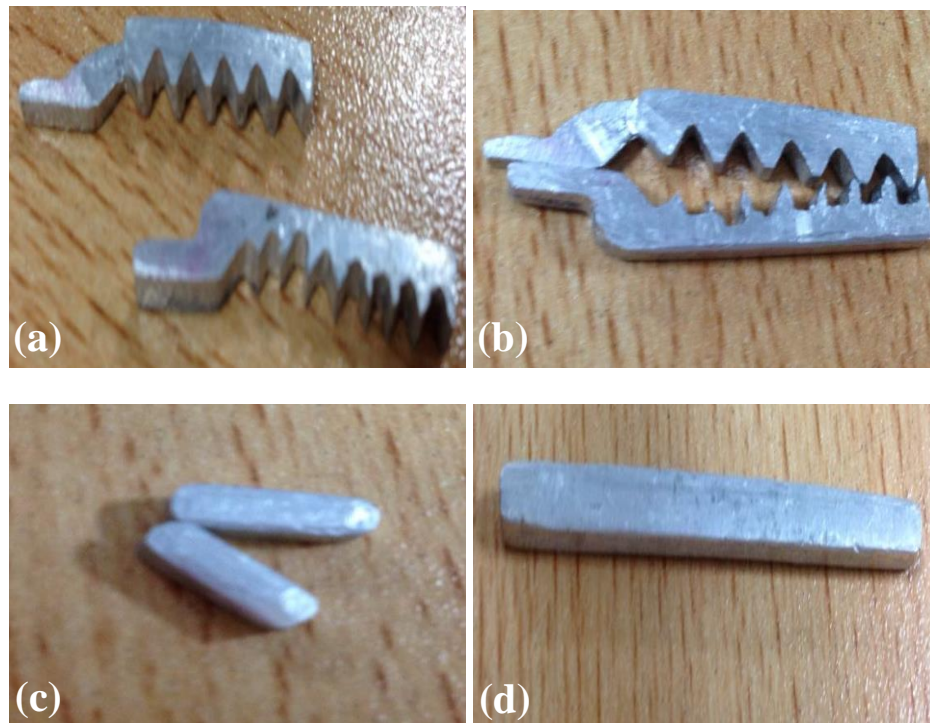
Illustrating different parts of the prototype fabricated using Needle File, (a) Grasper Jaws A & B, (b) Irregular Grasper teeth, (c) Short bars, (d) Long bar
